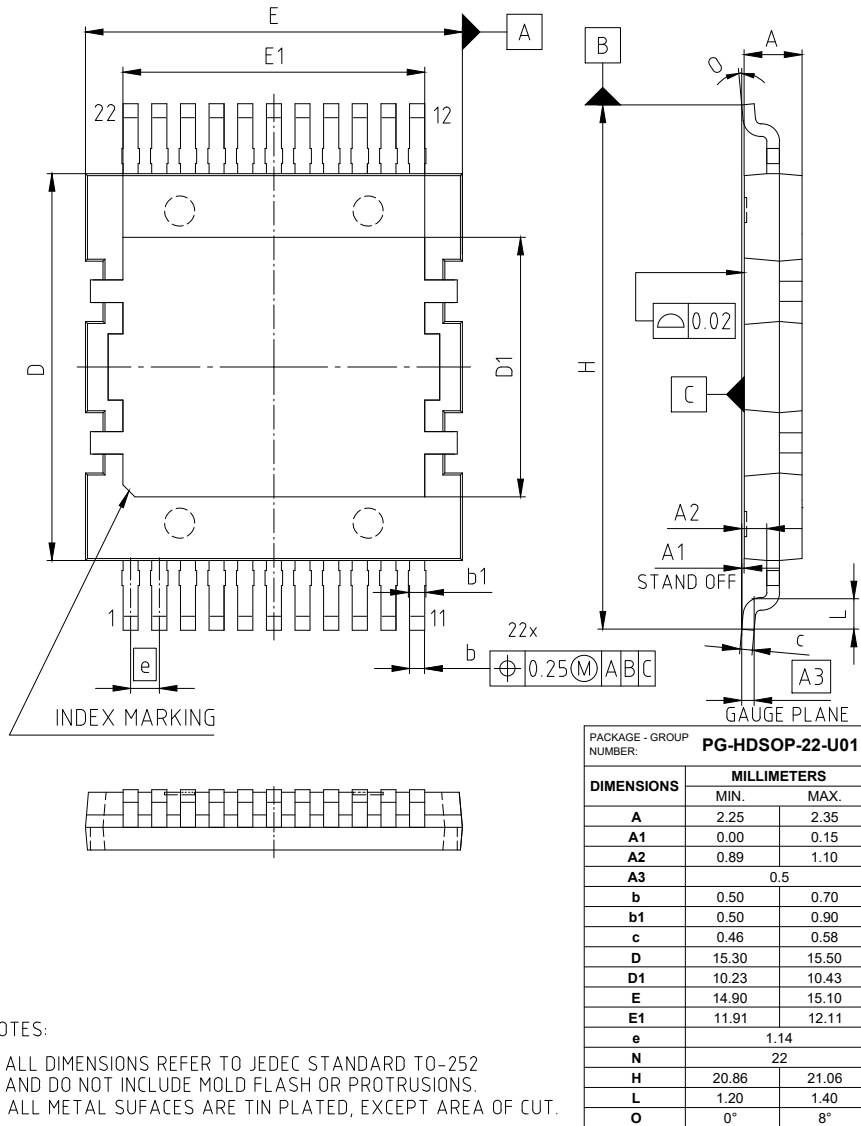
Outline PG-HDSOP-22, dimensions in mm
